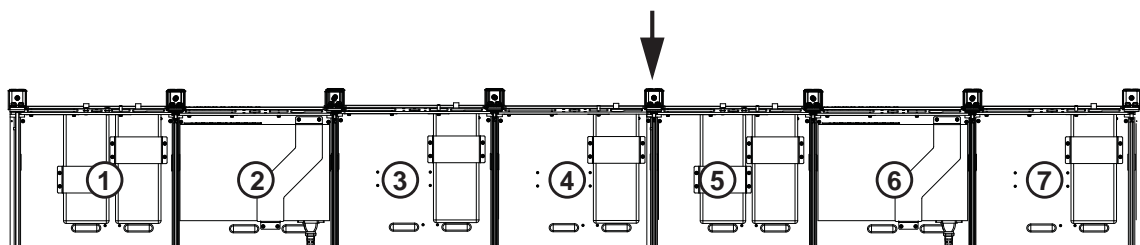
Where to detach chassis to move or expand a seven-chassis frame
